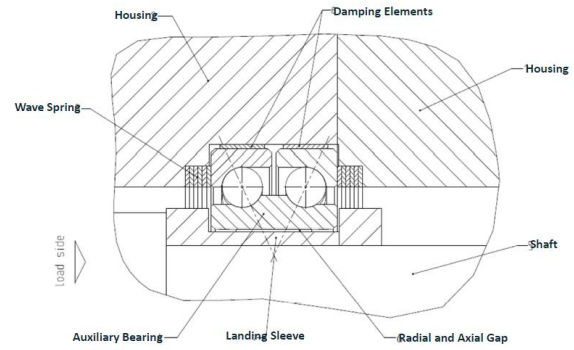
Auxiliary Bearing with Housing, Axial Preload with Belleville Washers, Landing Sleeve, and Wave Springs. A
